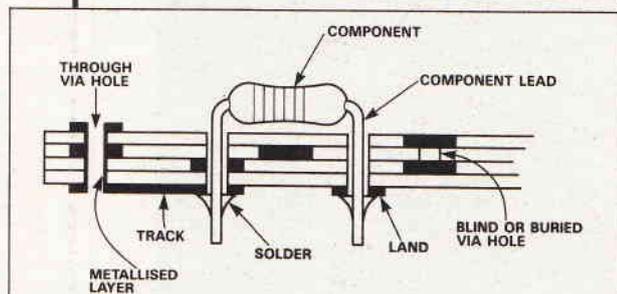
Principle of a multi-layer PCB, where many layers of copper track are laminated together with insulating layers to form a single board. Holes can either go right through the board, or merely between two or more of the layers
